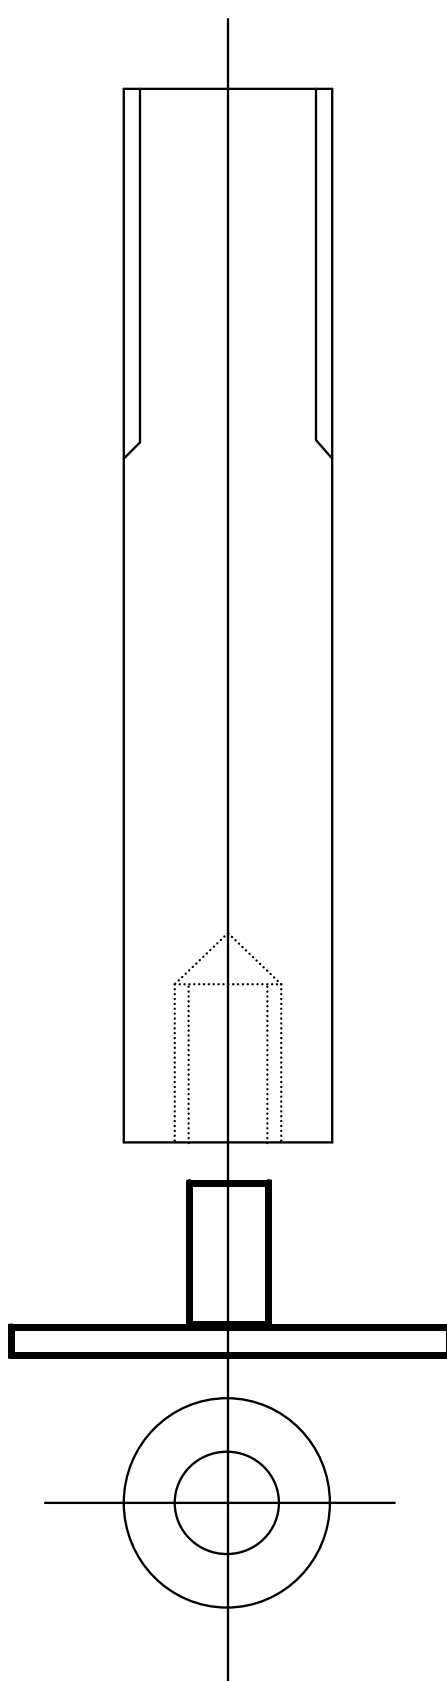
Schematic diagram of fixing jig for pipe side of specimen holder.
